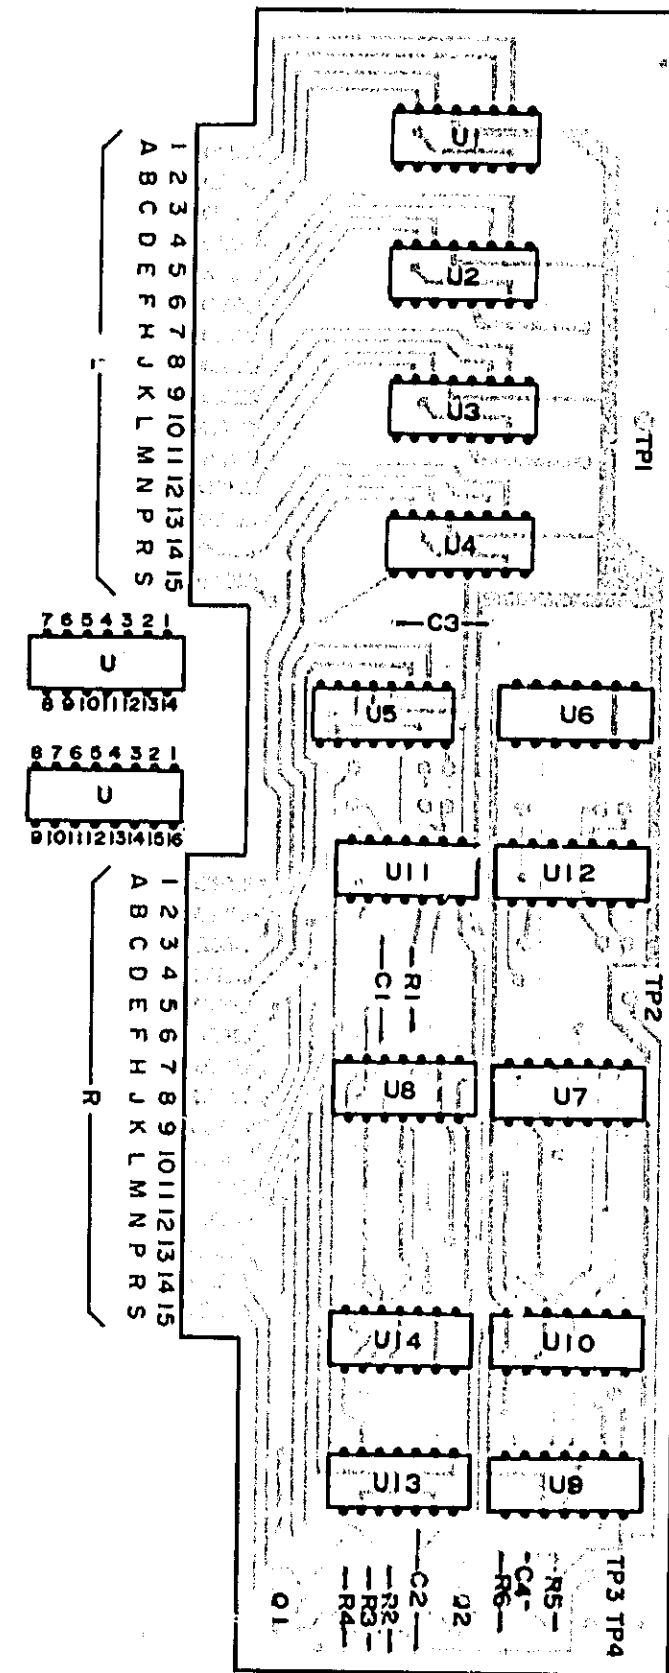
A24 G/R/D BCD Output Board Assembly Component Locations.
